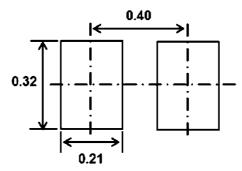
Land Pattern Dimensions (Unit: mm)
